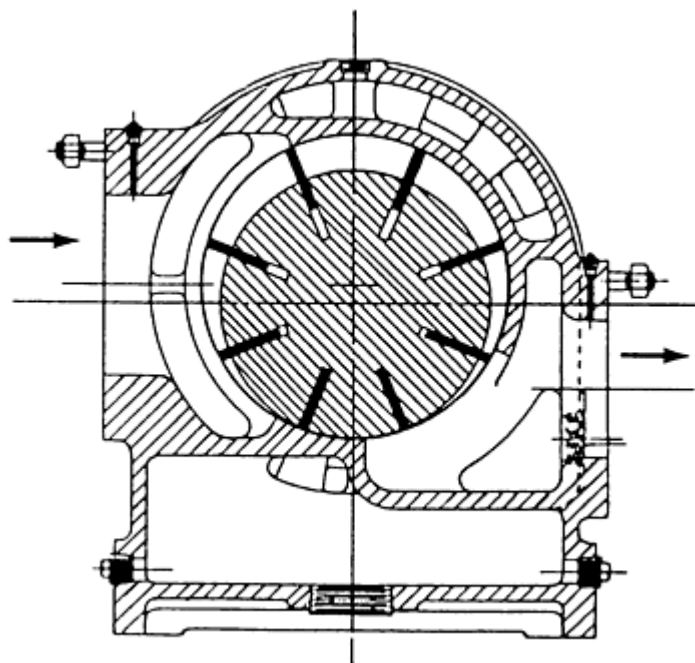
Cross section of sliding vane compressor. Courtesy of AC Compressor Corporation.
